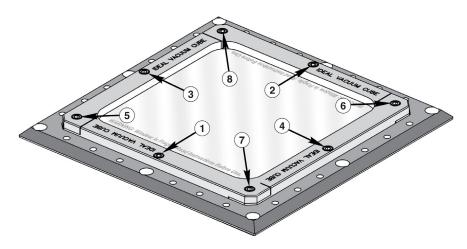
9x9 and 12x12 bolt tightening pattern
